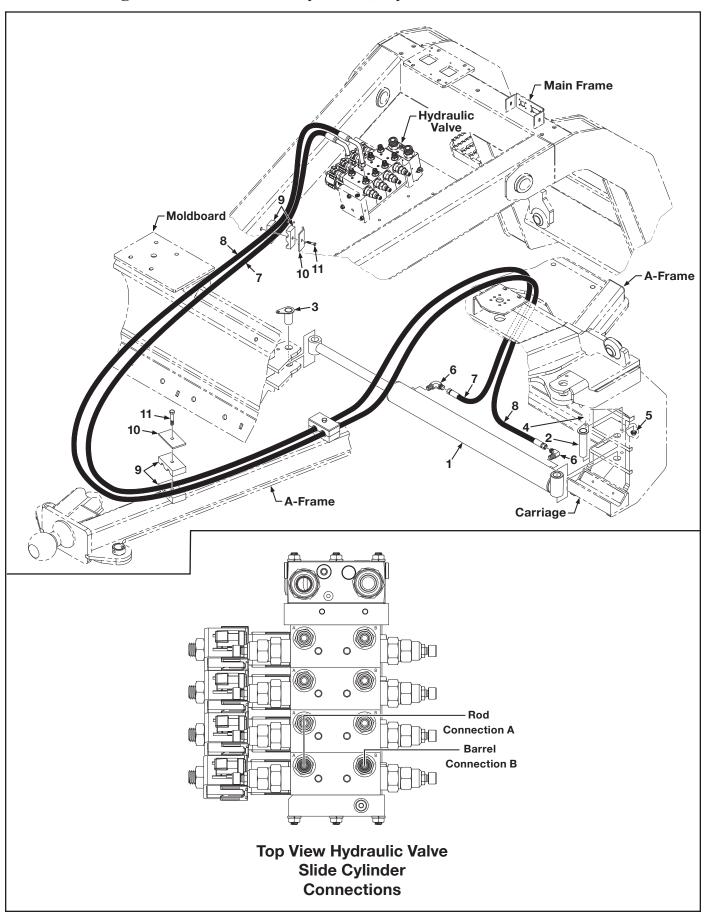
Side Shift Cylinders, Hydraulics & Related Parts
